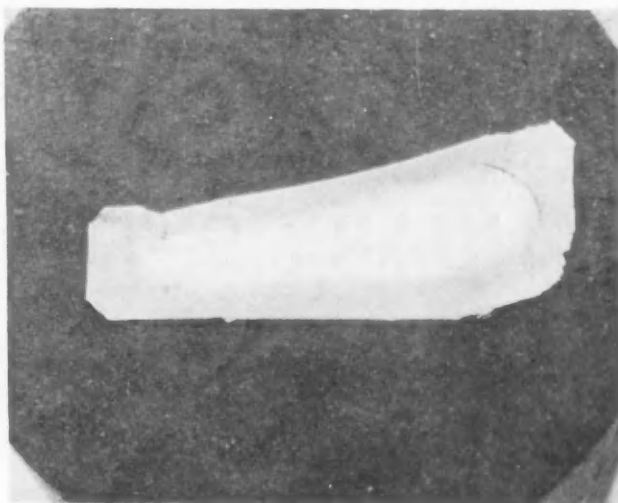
Section of the race in Fig. 37 showing how case cracked away from the core
